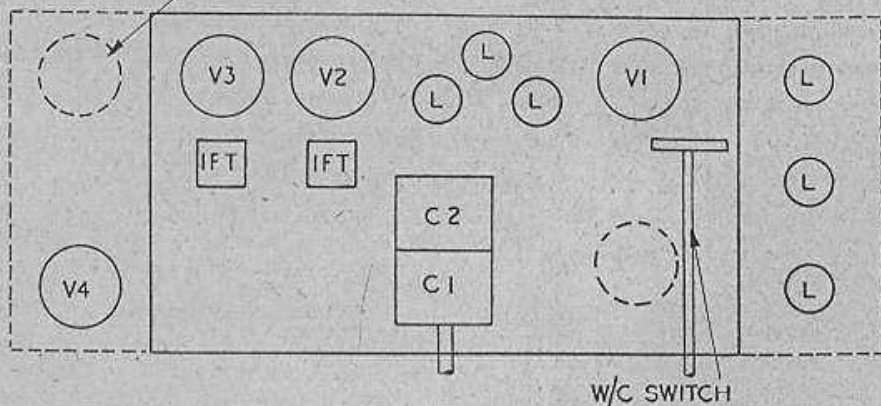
Sketch showing layout of chassis and main components. The dotted lines indicate the added chassis at either end.
